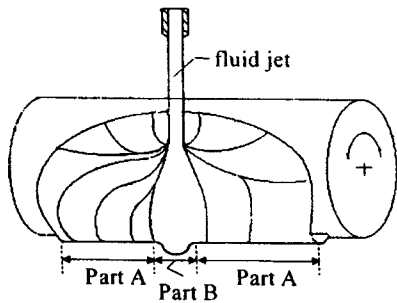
Cutting fluid behavior on workpiece and spin-off motion in machining process
